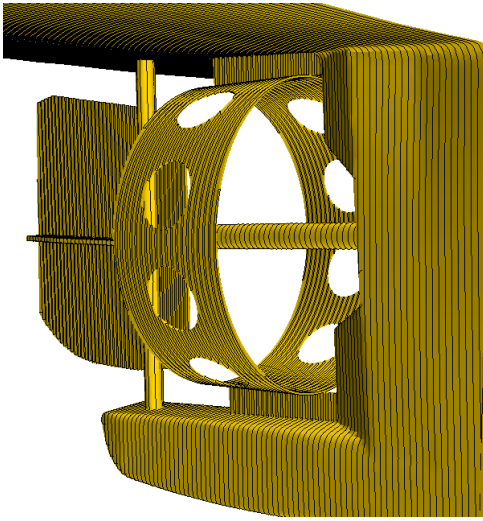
Bay Bliss alternate propeller cage 2 – ring with holes.
